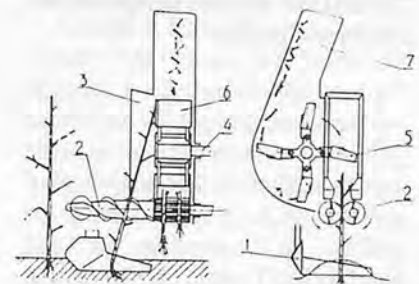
Uprooters-shredders KI-1, 2 and KI-1, 8: 1-blade; 2-coupled pulling cylinders; 3-guide; 4-shaft; 5- and 6-knives; 7-pipe.
